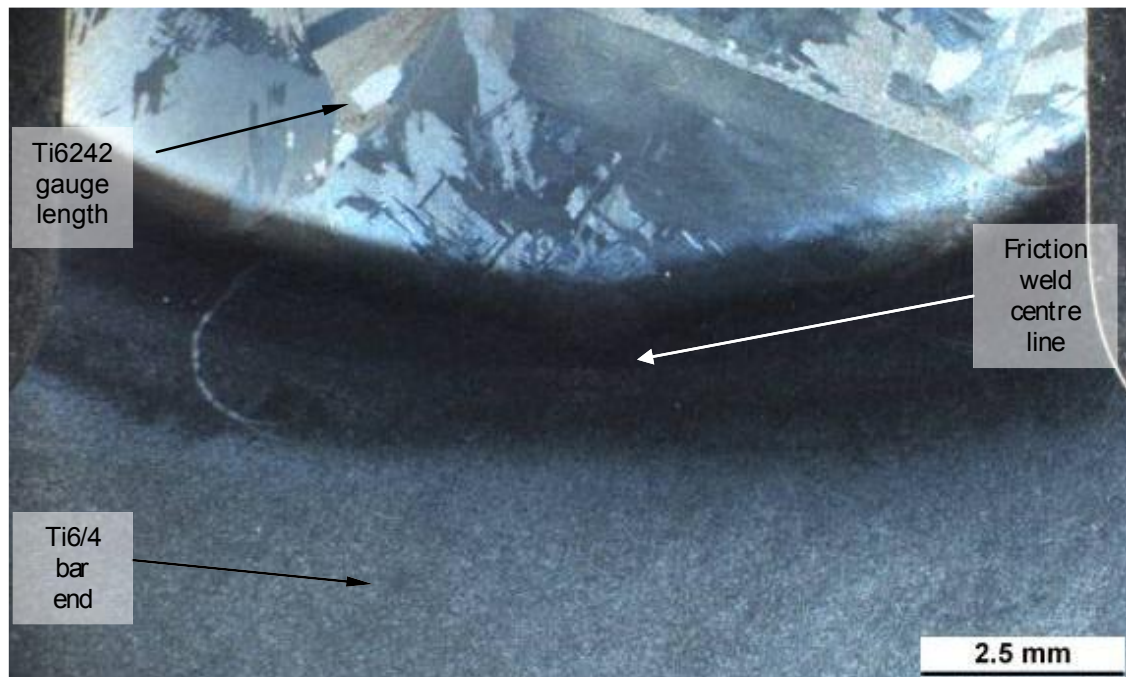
Cross-section profile of typical friction weld specimen
